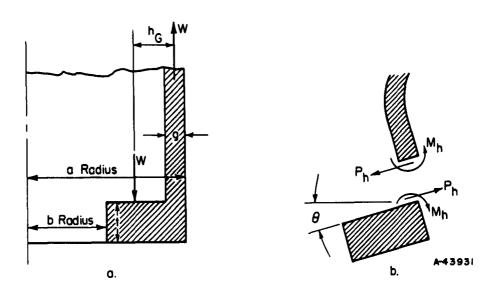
INWARDLY PROJECTING FLANGED CYLINDER NOMENCLATURE
